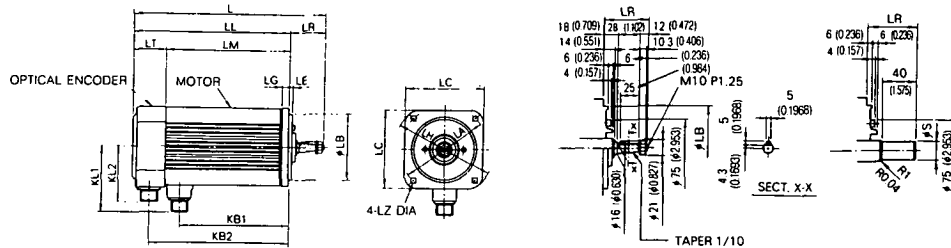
USAFED-02C□1, -03C□1 (Taper Shaft)
